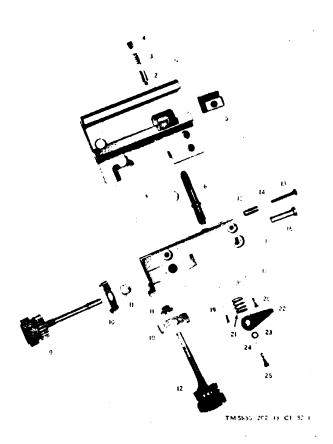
(1). Sight, exploded view (part 1 of 2).
